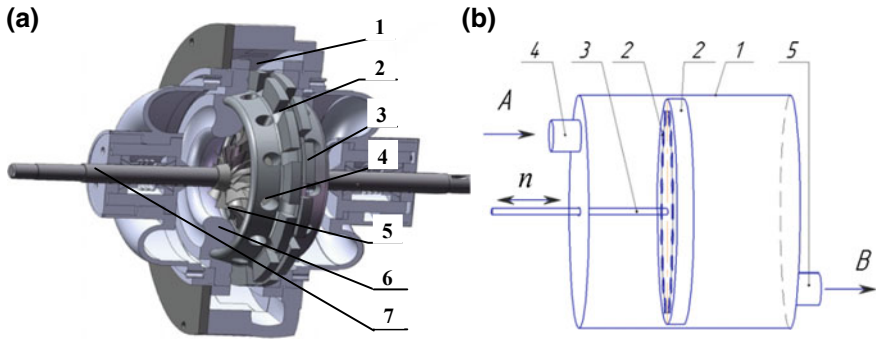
Construction: a rotor of the pulsation machine with a vibrating rotor: 1—pressure channel of the stator; 2—rotor slot; 3—rotor; 4—cross-holes of the rotor; 5—impeller, 6—stator with holes, 7—rotor shaft. b Process chamber of the reciprocating homogenizer: 1—chamber; 2—piston with holes; 3—rod, 4, 5—branches for the supply and discharge of the emulsion, 6—piston holes, A—emulsion supply, B—discharge of the homogenized product
